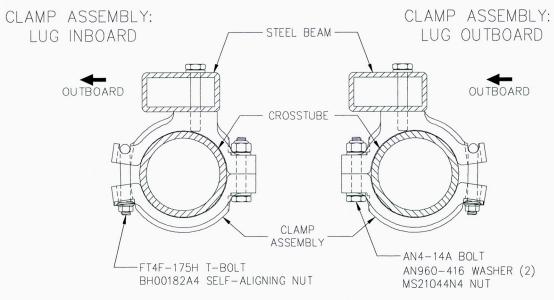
Beam Installation – Clamp Detail Lug Inboard and Lug Outboard Installations Shown
